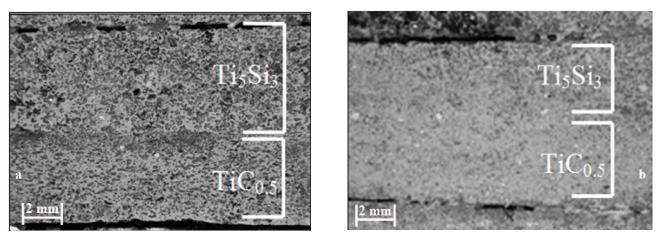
Weld joints obtained at F = 0.22 (a) and 26.0 kPa (b).
